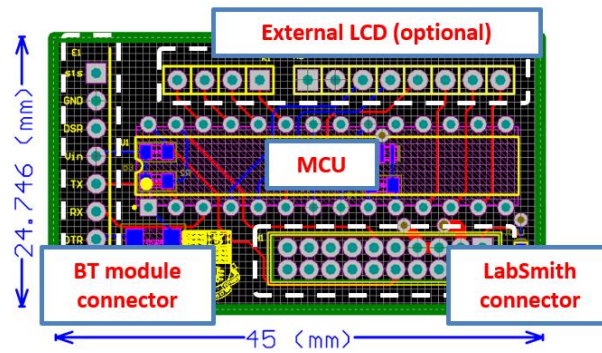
The PCB layout of the first-version wireless LabSmith controller
